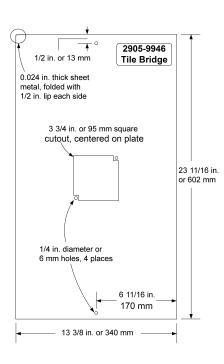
Ceiling mount S/V installation reference and tile bridge dimensions
